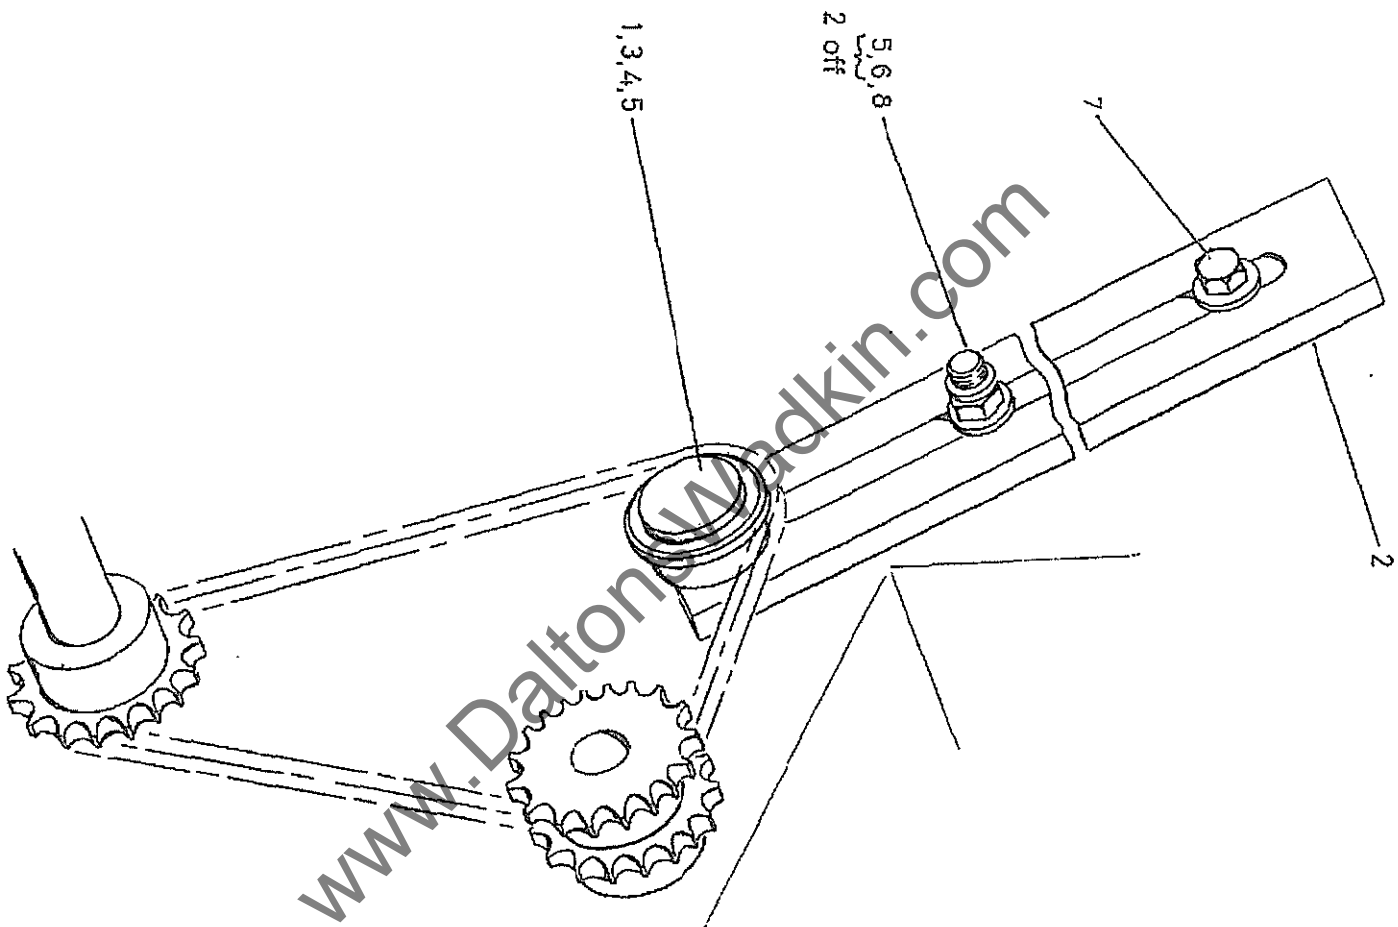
CHAIN TENSIONER TO AXIAL SPINDLE ADJUSTMENT
